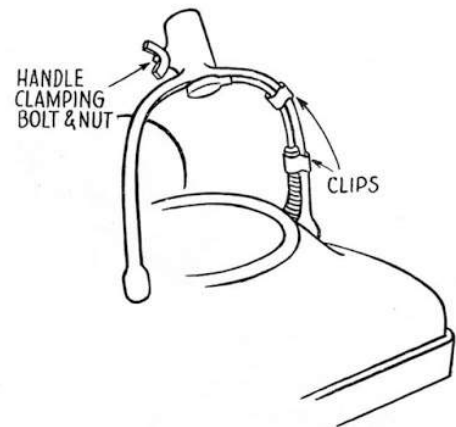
Handle bail—showing handle clamping nut and bolt, motor lead cord and plug, and cord clips
